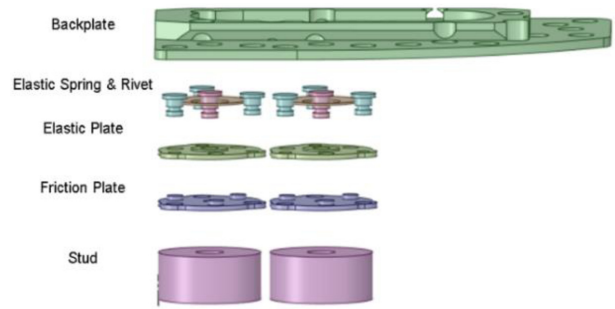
The components of the flexible brake pad. The elastic parts are the elastic spring and the elastic plate
